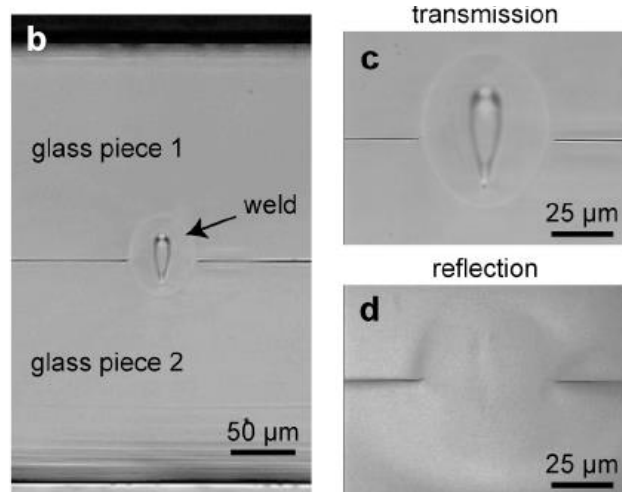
Transmission and reflection images of a weld seam between the two surfaces [127].
